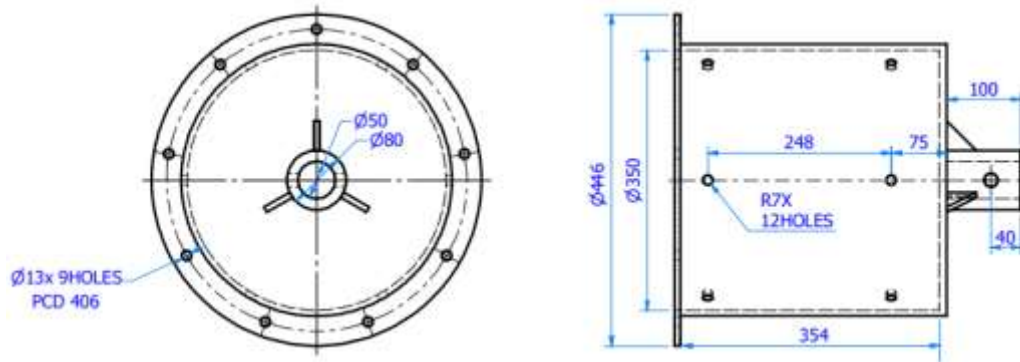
Major Dimensions of Cylindrical Mill Drum
